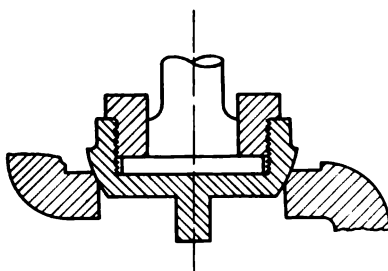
Enlarged Section Through Valve Disc and Seat for 1-inch Crane Globe Valves Tested. Dimensions Given in Table 2, Page 26.
